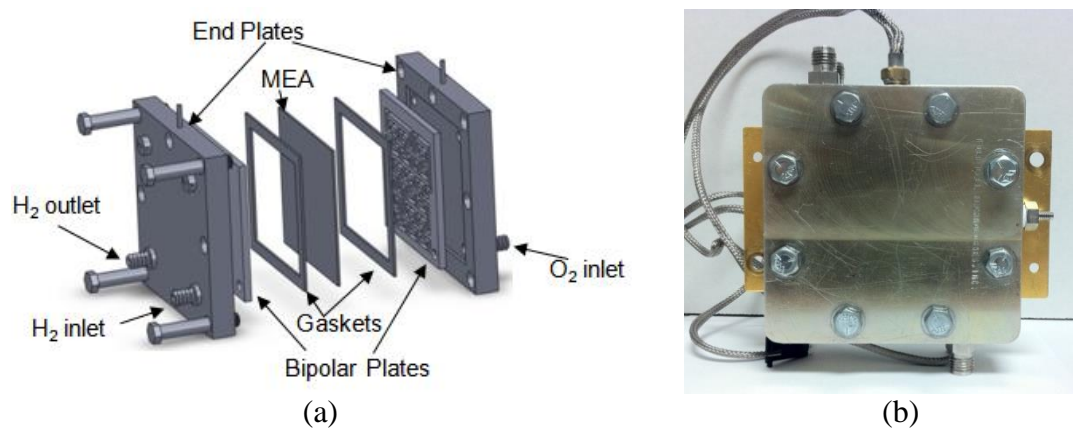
(a) Major components in a PEM fuel cell; (b) Actual fuel cell assembly used in the study.
